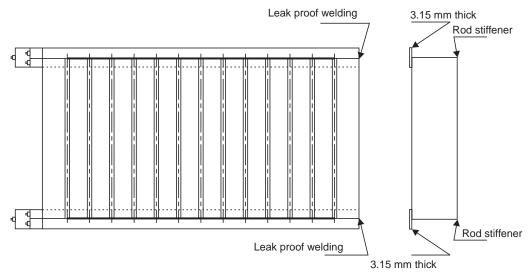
Additional thick strip being welded at top and bottom for easy fixing of the panel to the tank body
